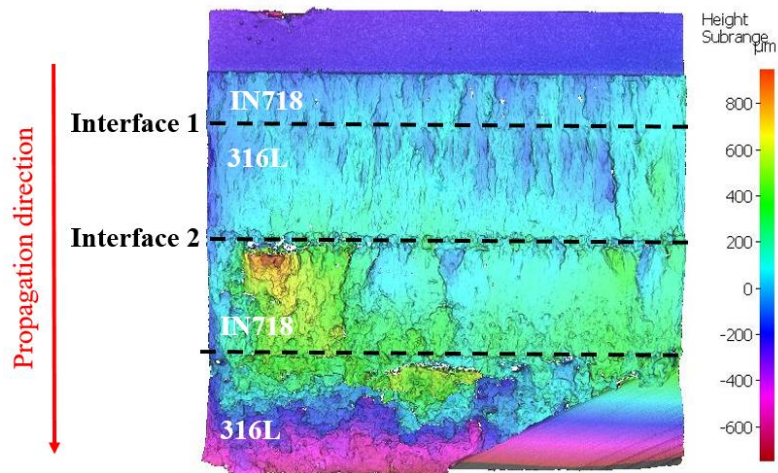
Alicona view of final fracture surface of 4-layer HTed specimen.
